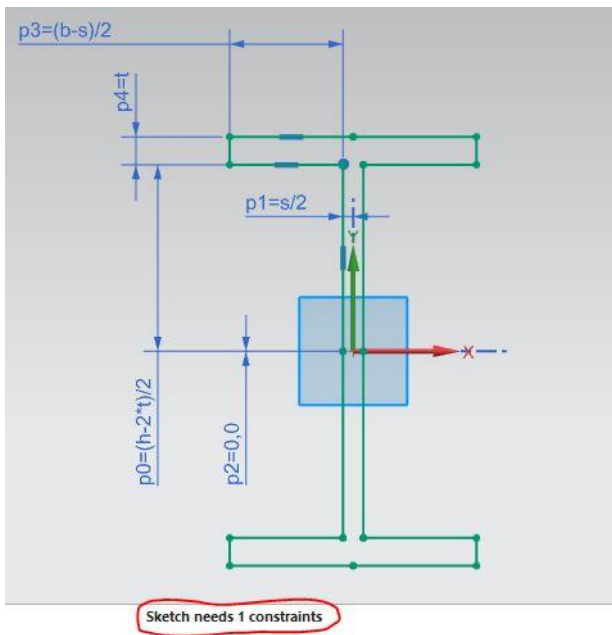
Under constrained sketch, too few dimensions describing the sketch
